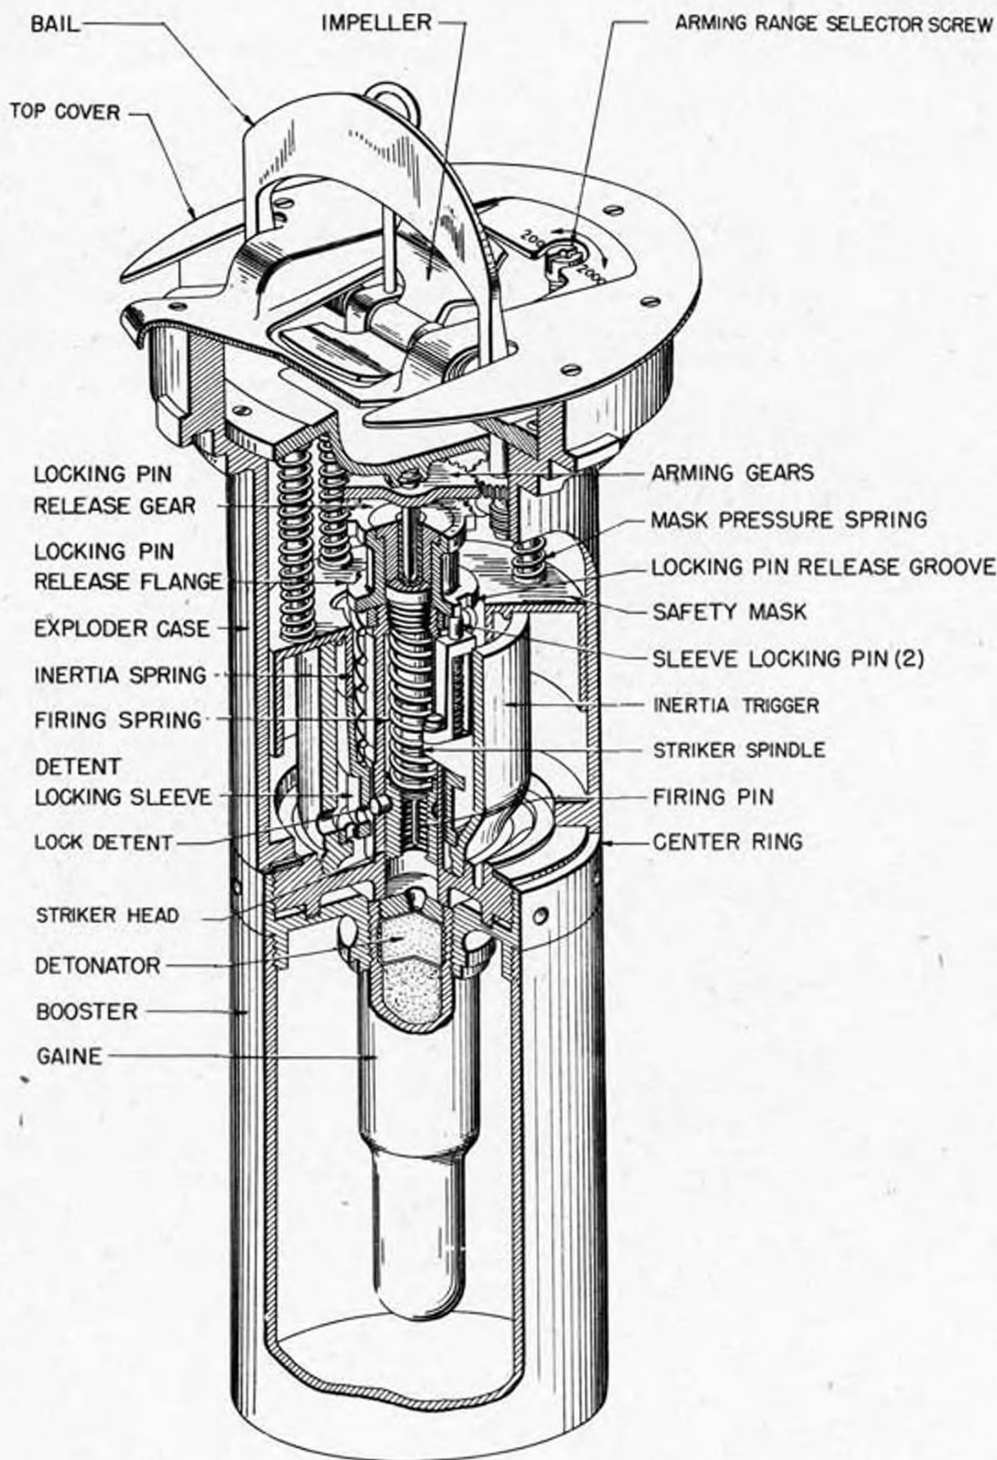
Type 90, Exploder, Sectional View in Elevation
